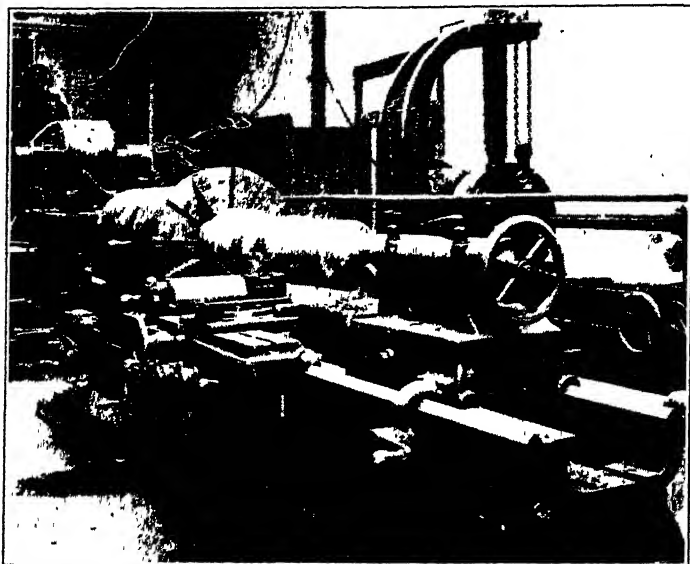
TYPE OF LATHE AND TOOL HOLDER USED IN TOOL TESTS DESCRIBED
